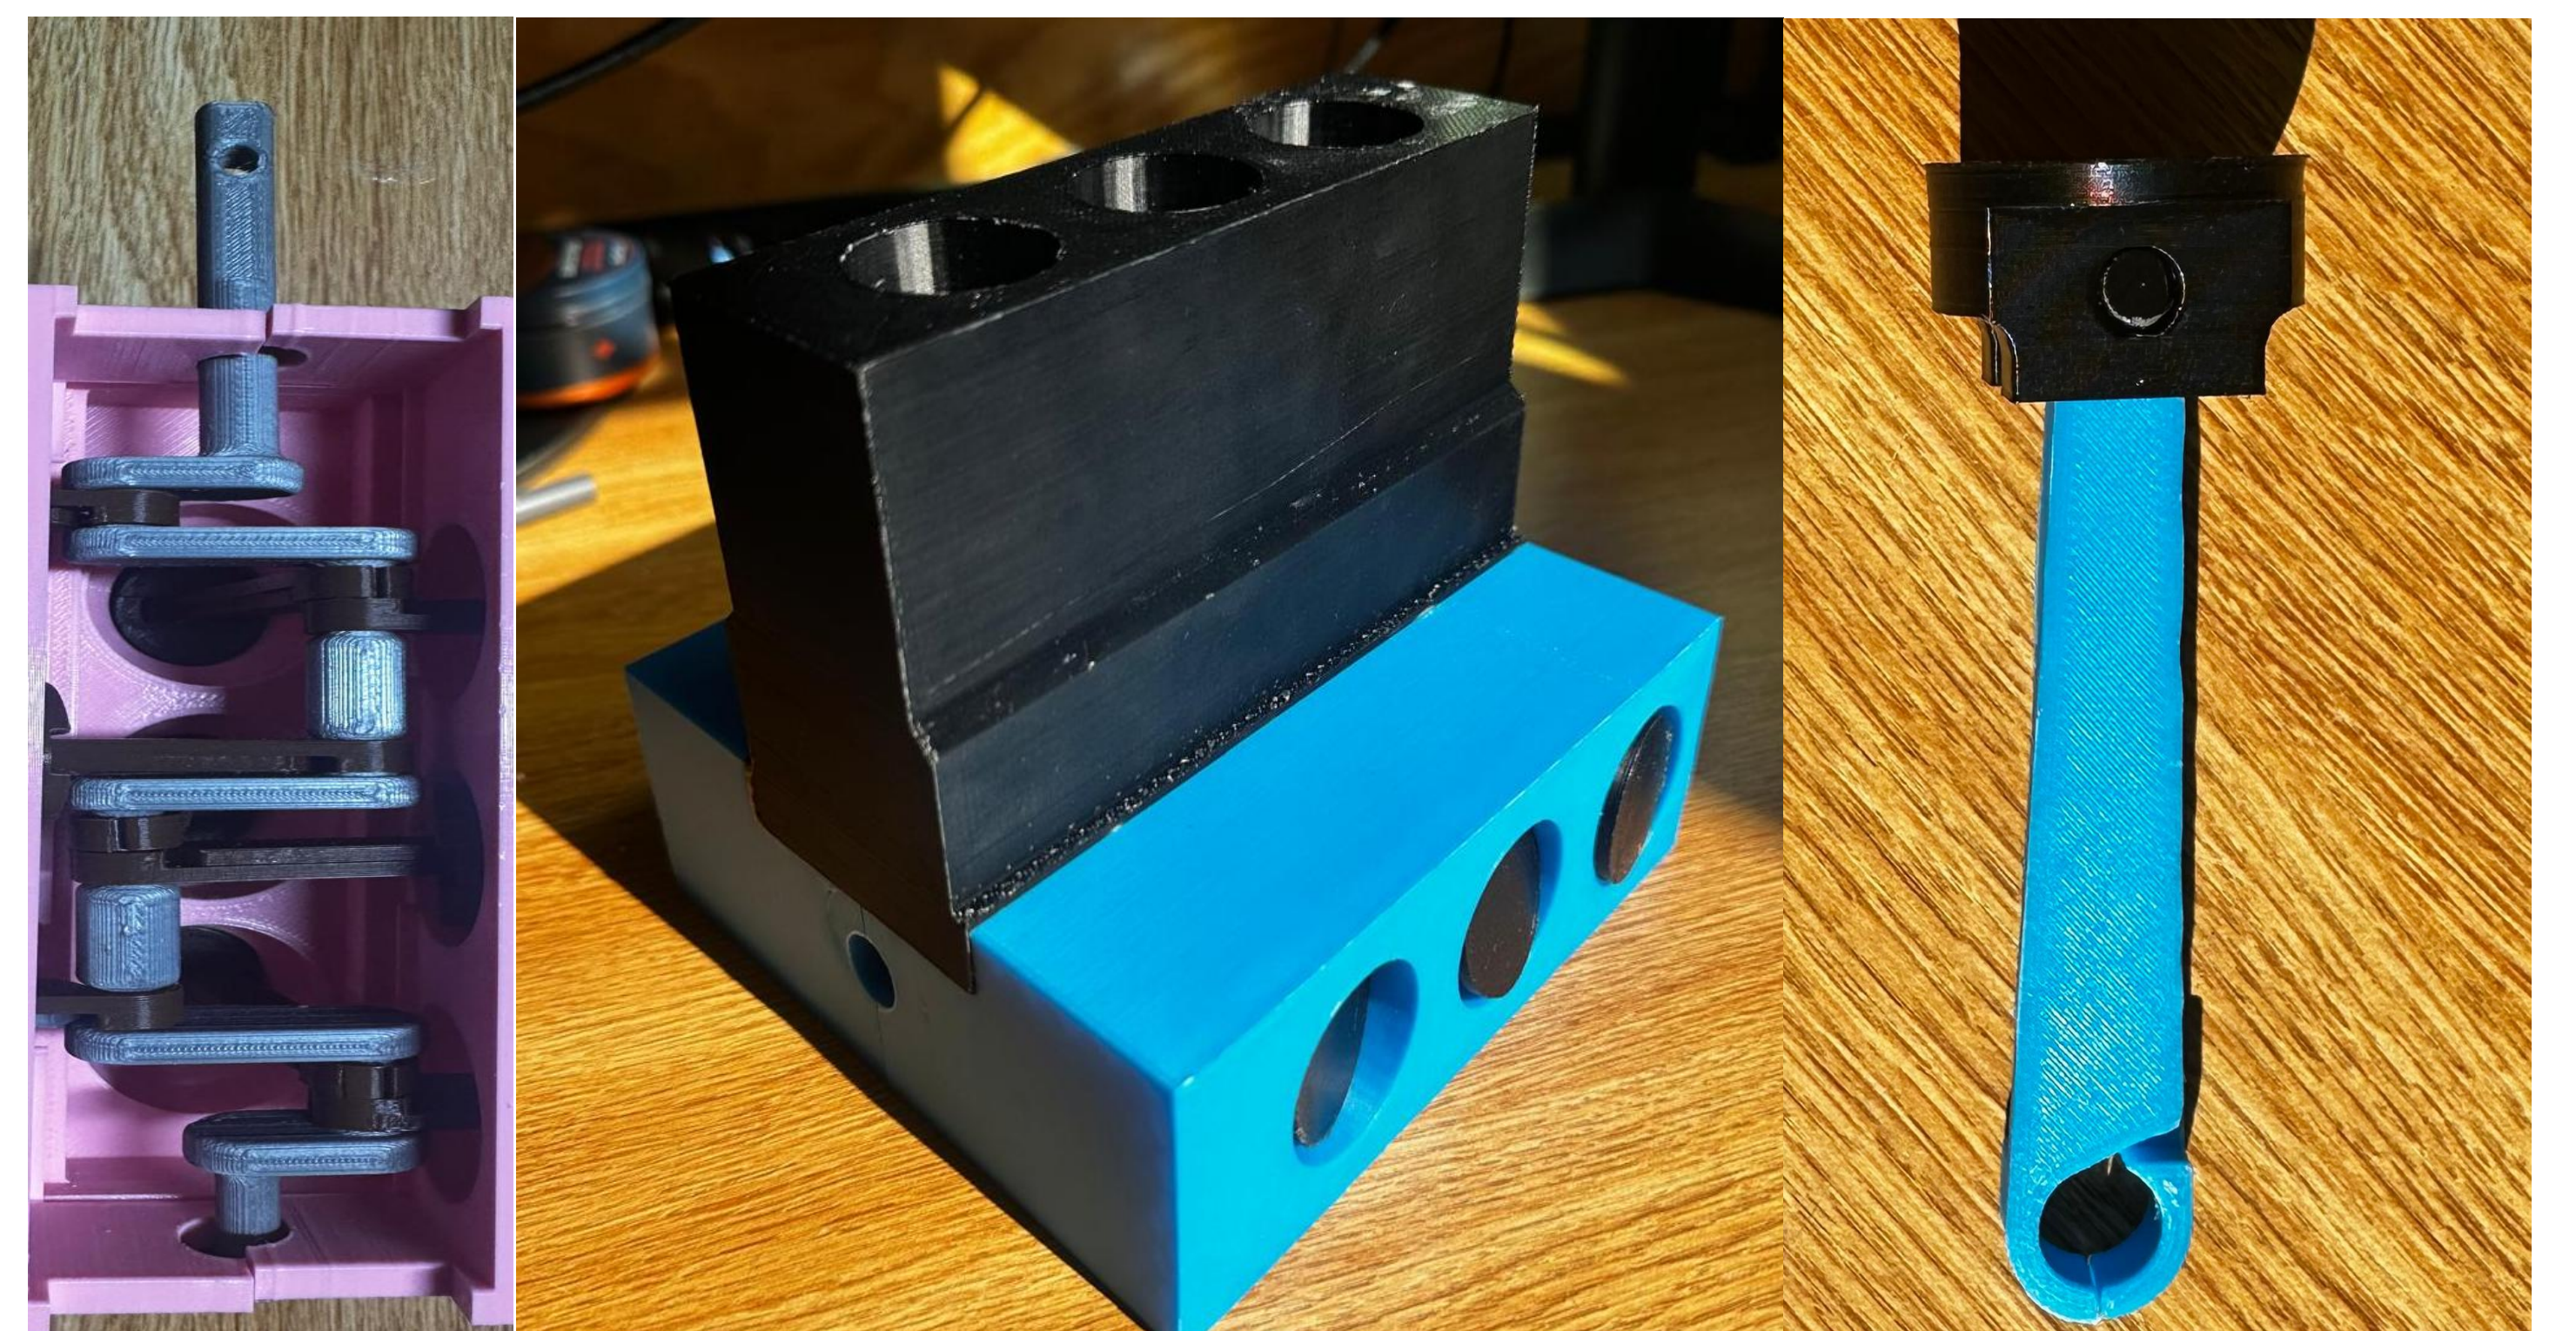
Crank shaft, engine block and piston assembly. By creating a cad design, adjusting tolerances, and adjusting the 3D printer settings, a working 15% scale model was able to be printed.
